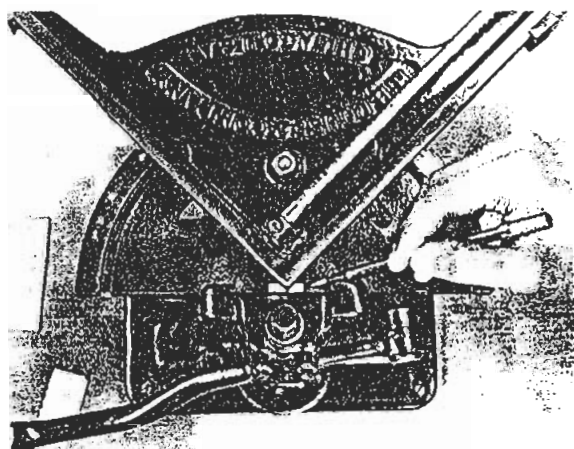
C. Cardboard Strip Causes Rule Face to Be Cut Slightly Longer — Gives Better Joints
